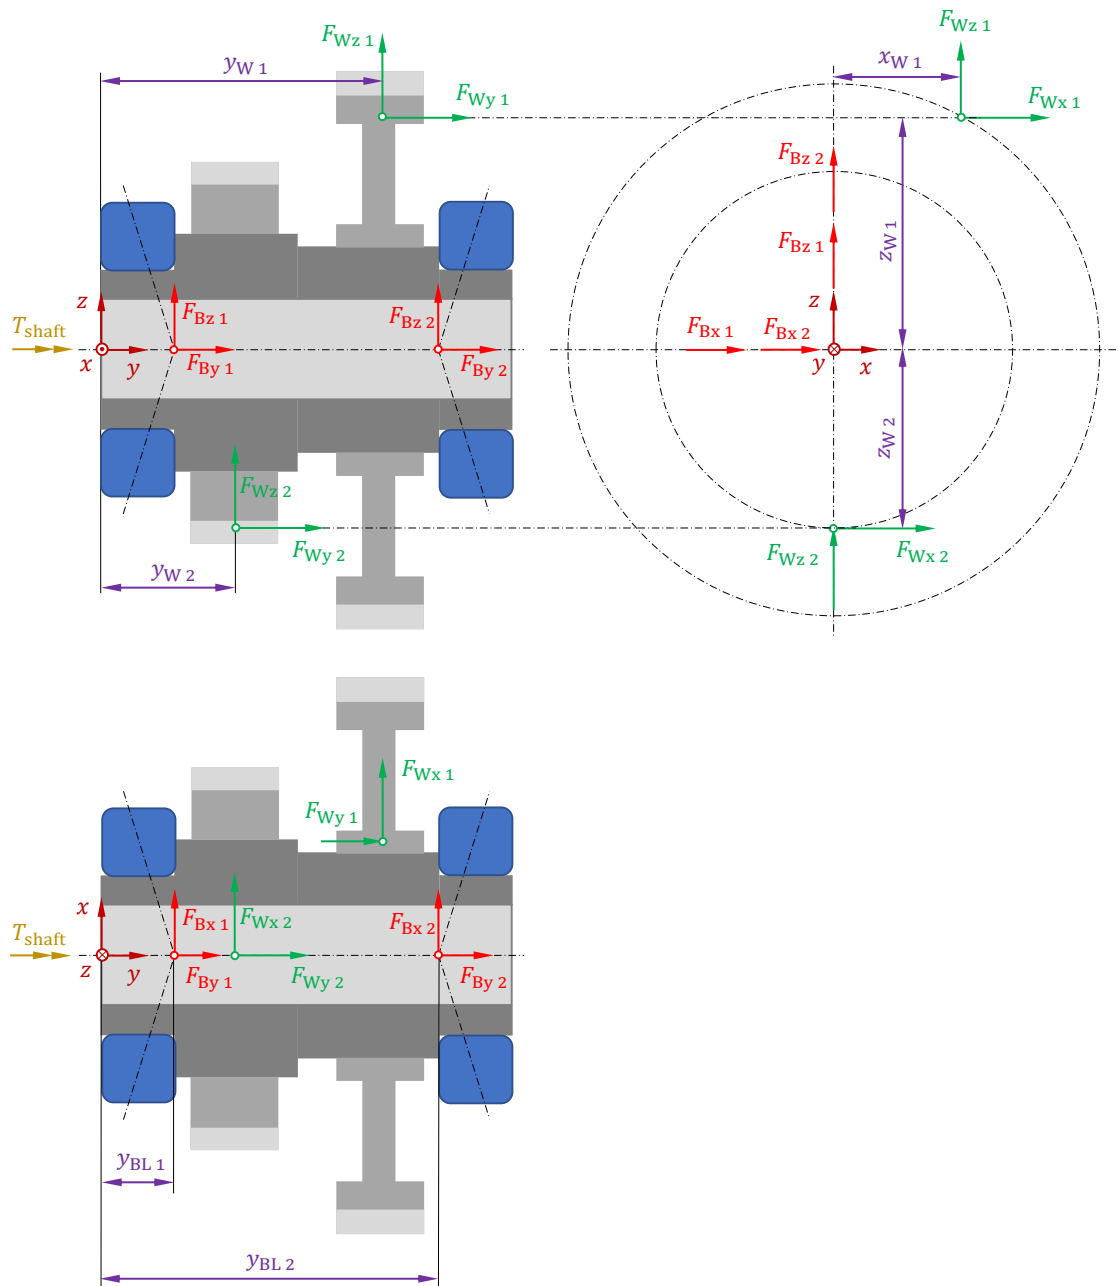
Free-body diagram of a shaft assembly with forces imposed by two gear wheels
